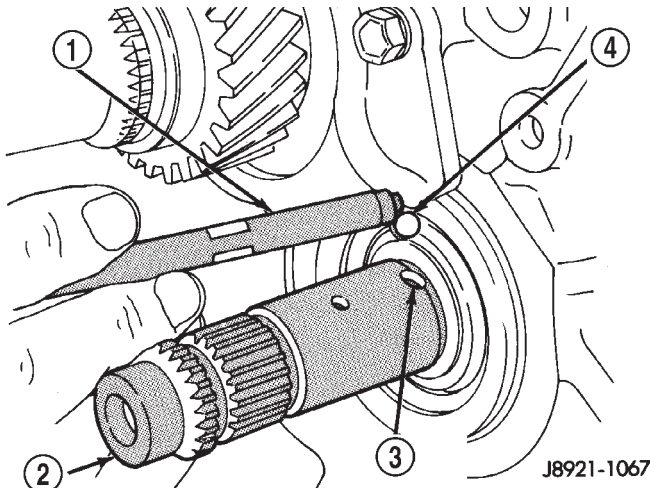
Install Fifth Gear Thrust Ring Lock Ball
